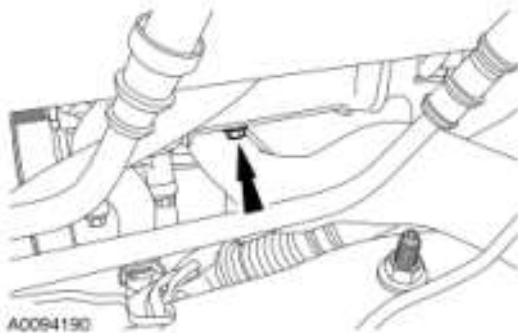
Installing Power Steering Reservoir Assembly Bolt
